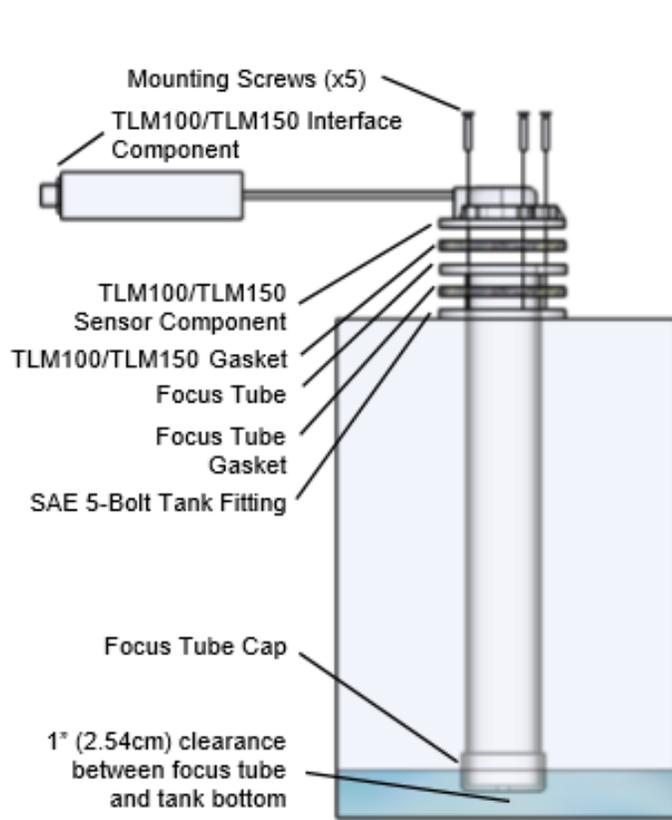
Mounting TLM100/TLM150 and Focus Tube (TFT-5H) to SAE 5-Hole Tank Fitting
